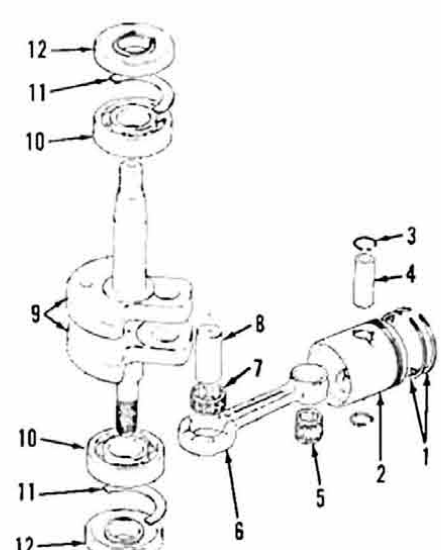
Exploded view of crankshaft, piston and related components. On 1988 and later models, thrust rings (11) are full-circle design.
